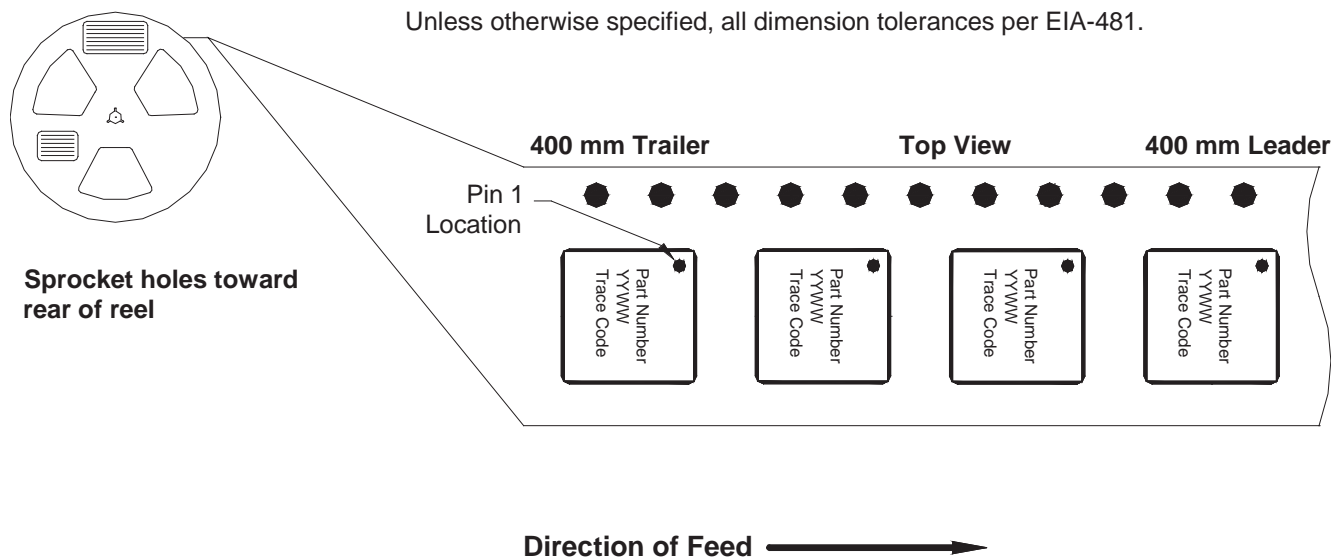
5.24mmx6.63mm (Carrier Tape Drawing with Part Orientation)
